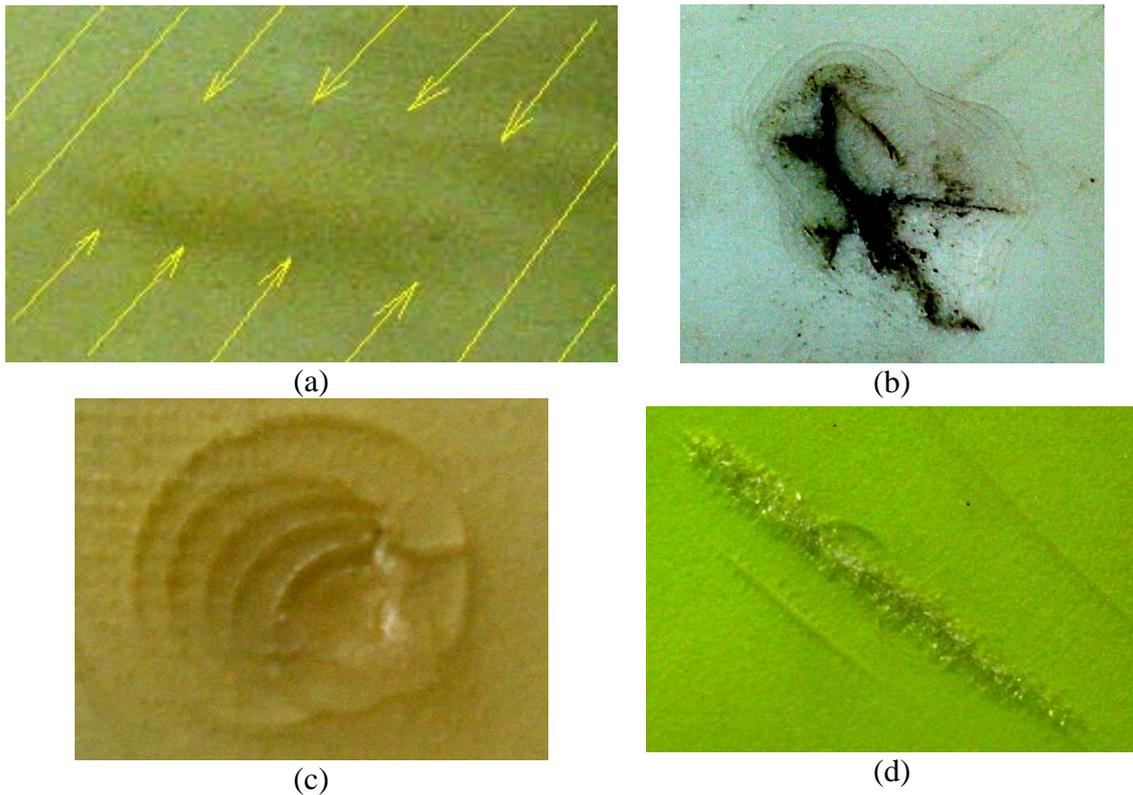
Photographs showing several types of damage on surfboards caused by the head and knees (a) and rocks (b to d).
